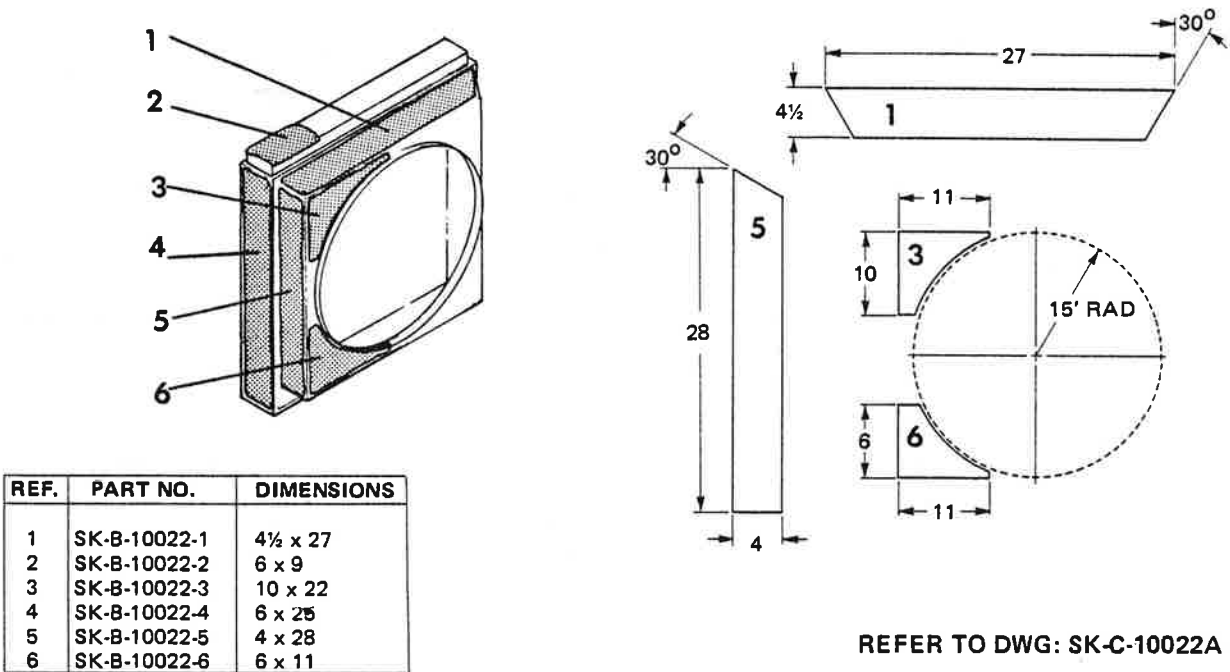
dimensions and locates the six pads that are glued to the radiator and shroud assembly.
